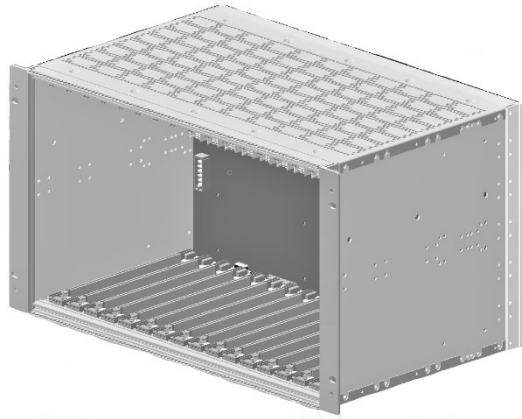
ALS v2 Standard Chassis Assembly with ALS-050 Backplane PCB
